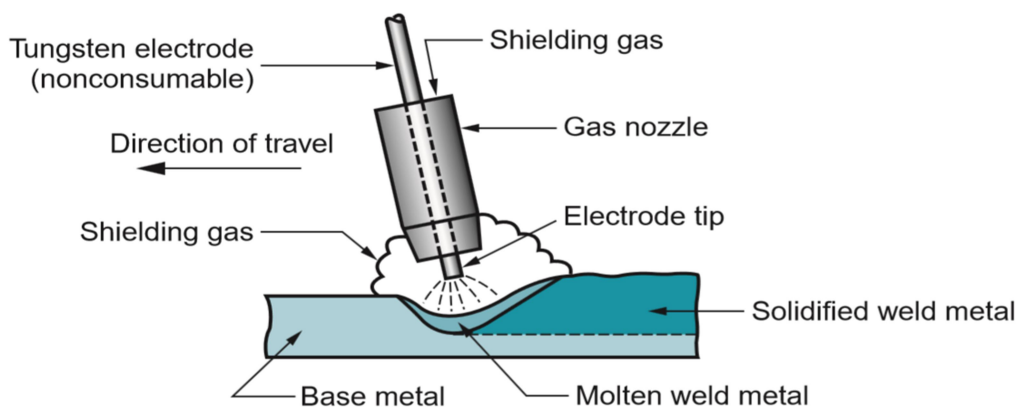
Gas tungsten arc welding (GTAW).
